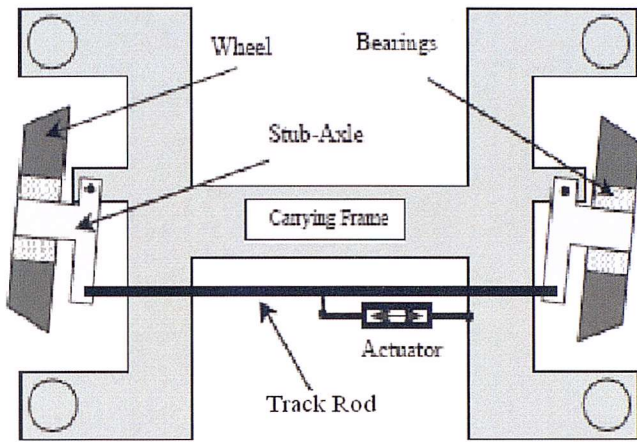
13 Steered wheels, using stub axles and track rod^[13]
